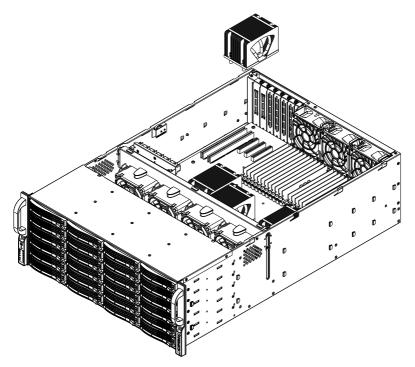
Installing Heatsinks on the Motherboard Installation
